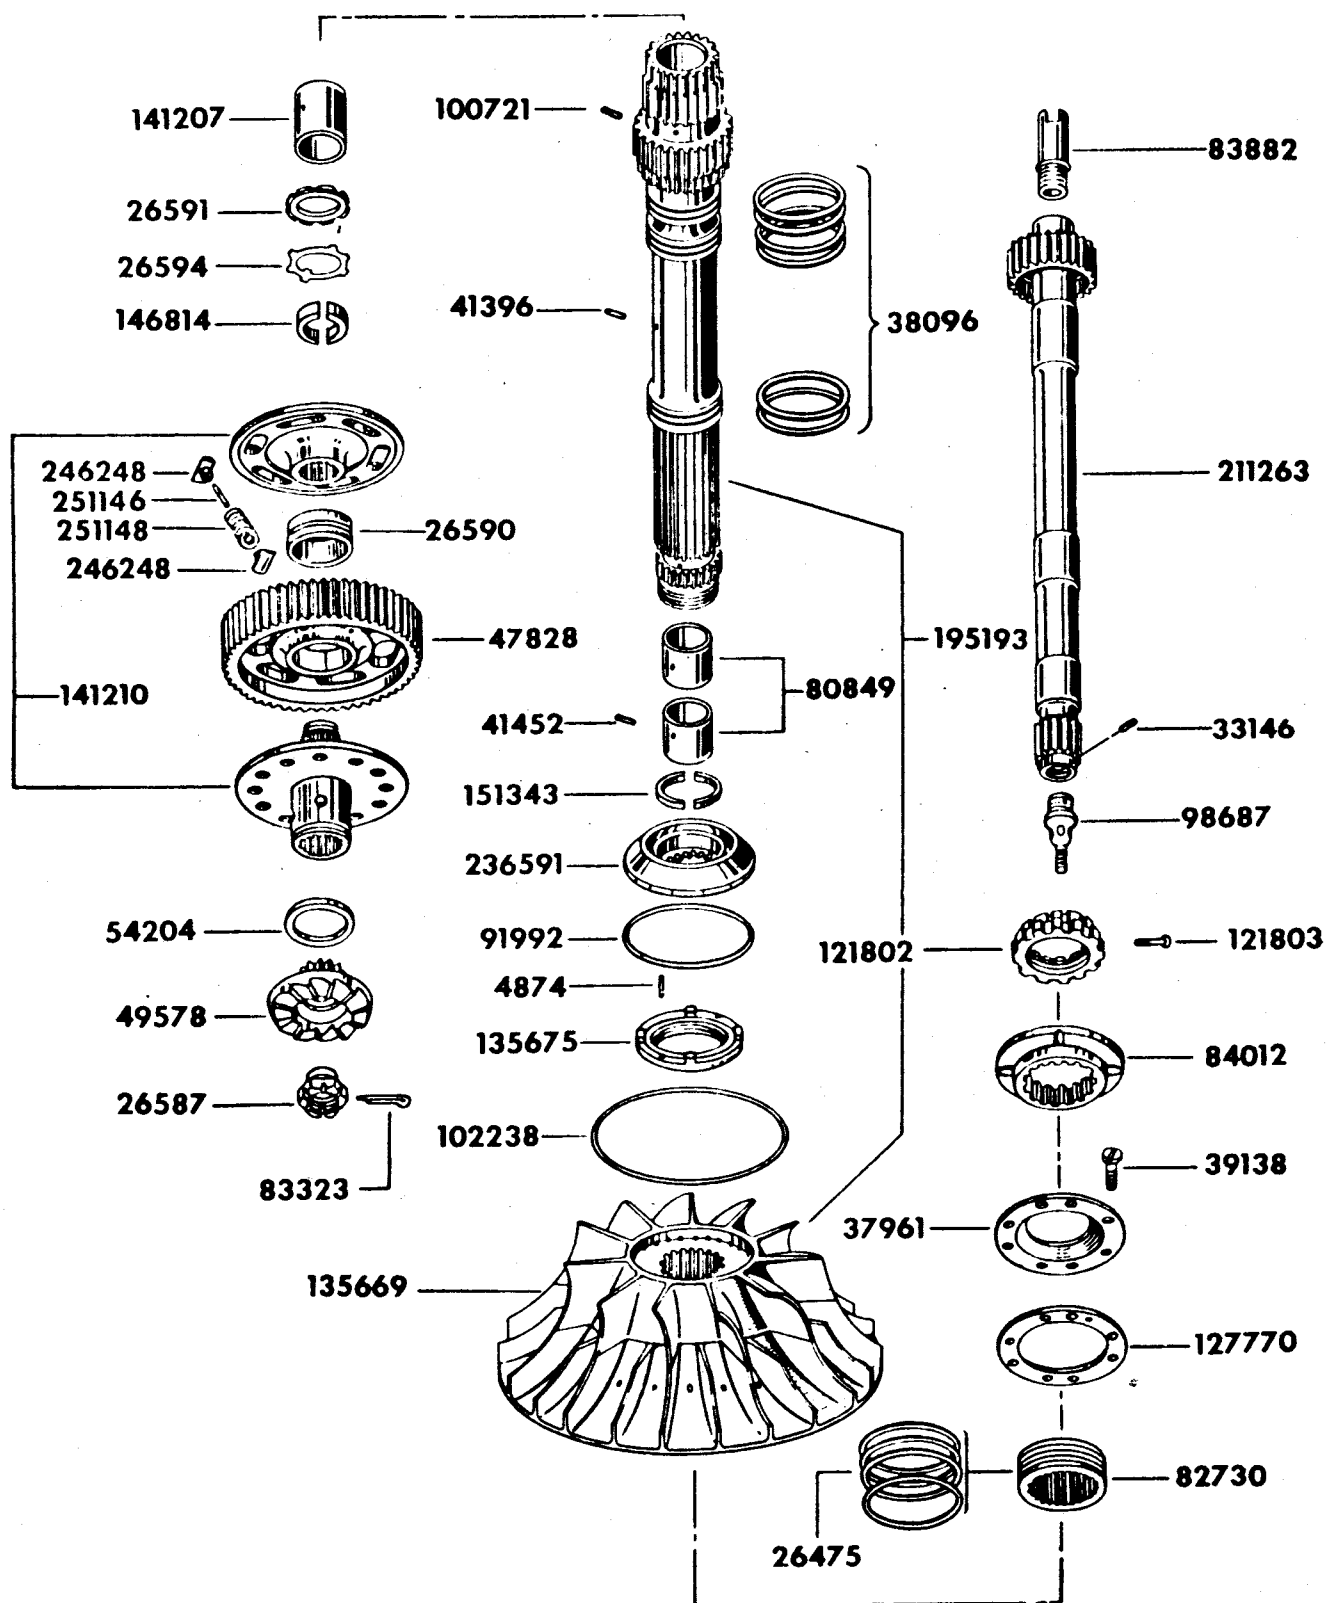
Accessory Drive, Impeller and Starter Jaw
